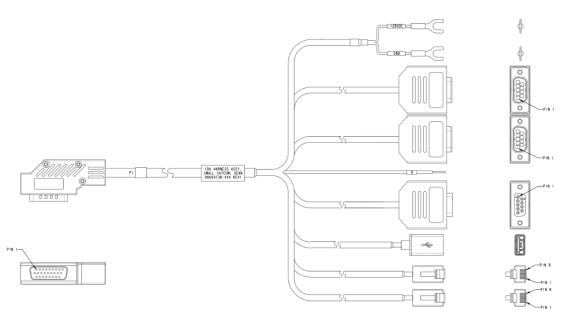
Example of a Fully Populated Power Data Cable Assembly
